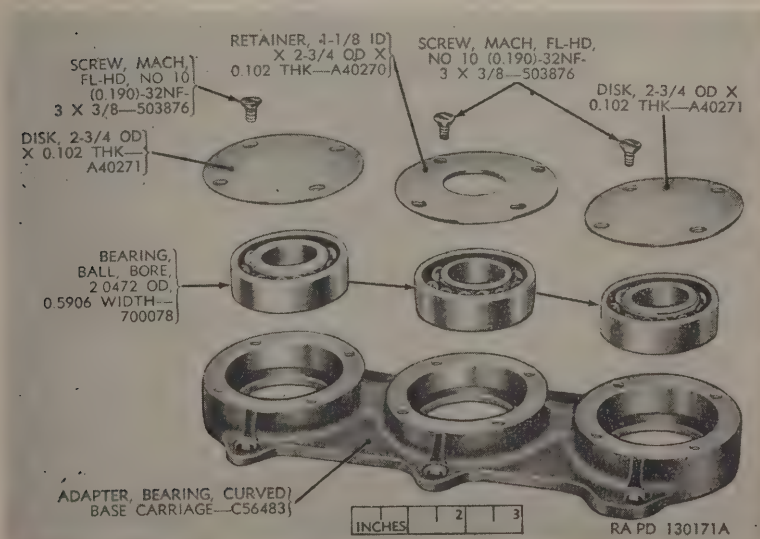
Components of curved-base carriage bearing adapter assembly—sound-ranging plotting board M1 or M1A1.
